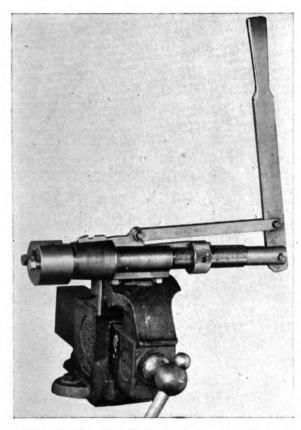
Special Tool Used to Cut Keyway in Worm Gears. (This can be done with any other machine capable of cutting a keyway.)
